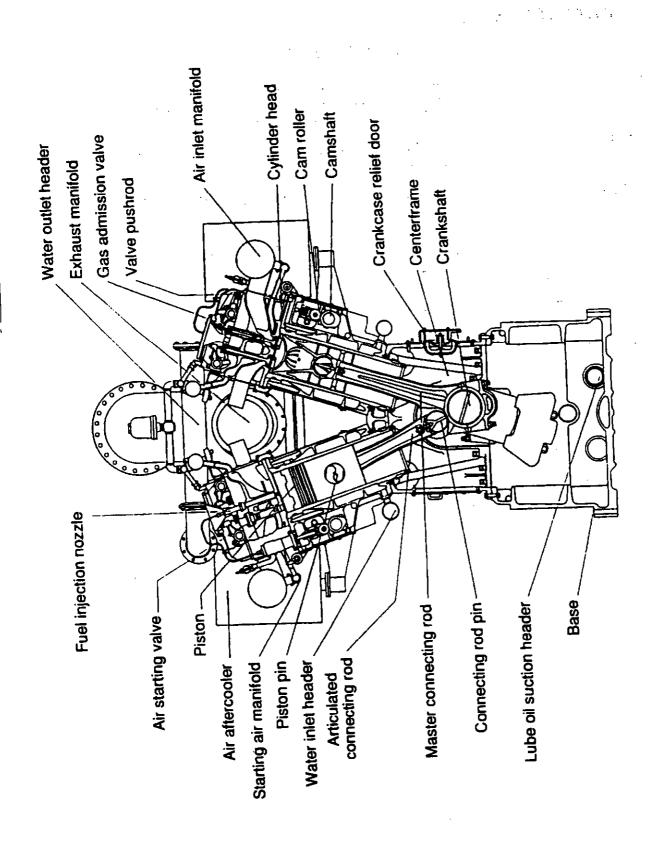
Cooper-Bessemer LSV Dual Fuel Engine Cross-Section
